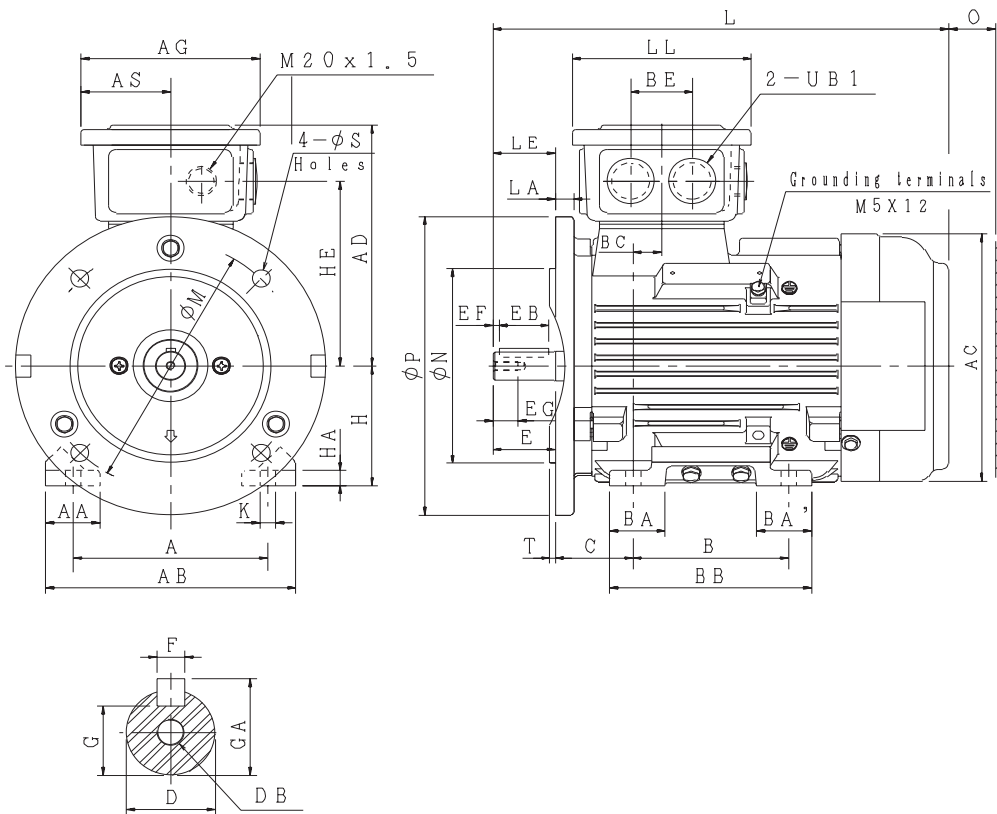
Outline drawing of cast iron design, feet version, mounting B35; frame size 80M - 90L
